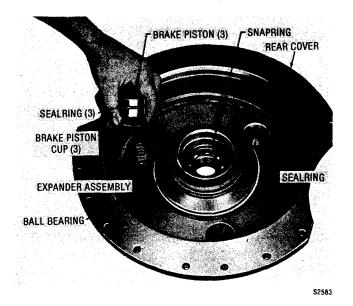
Installing brake piston components in rear cover (TTB)
